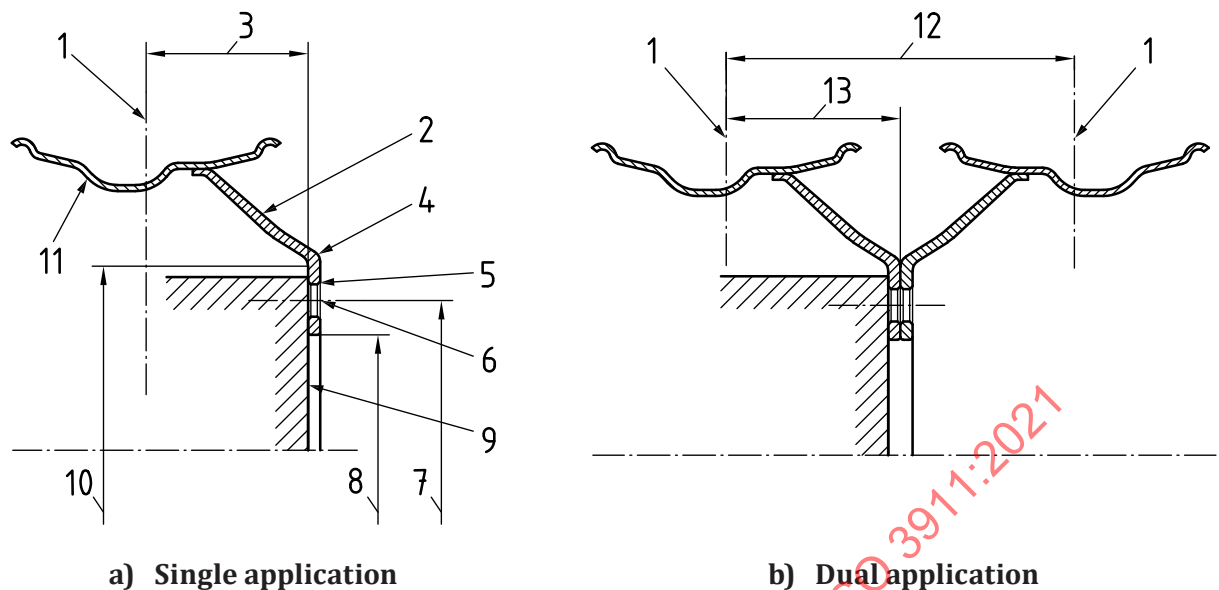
Passenger car and light commercial vehicle disc wheels — Nomenclature
